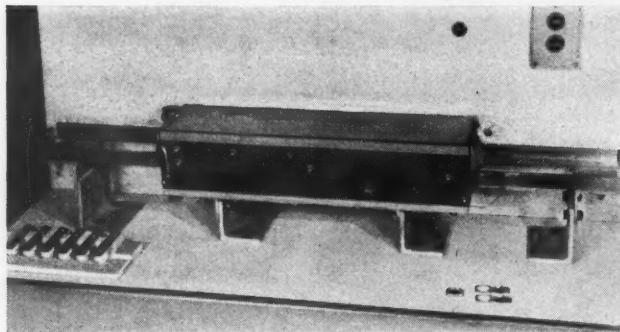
Setup with Atmosphere Chamber, Coils and Fixtures Brazing Watch Cases
